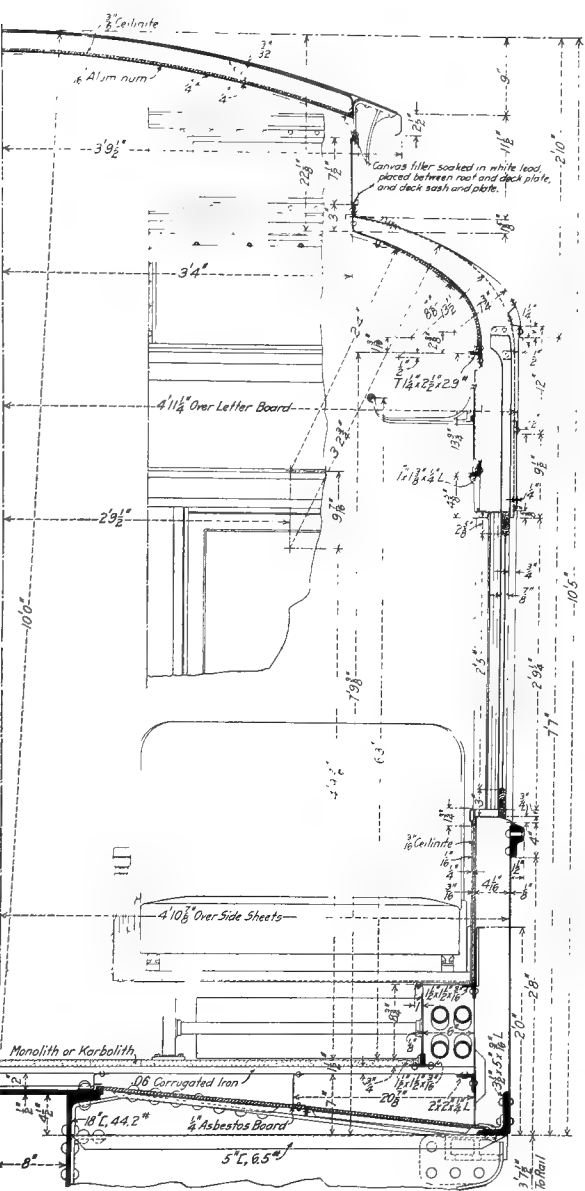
Cross Section of Pennsylvania Railroad Steel Day Coach and Combination Cars, Classes P70 and PB70. Section Through Windows Shown in Fig. 387.
